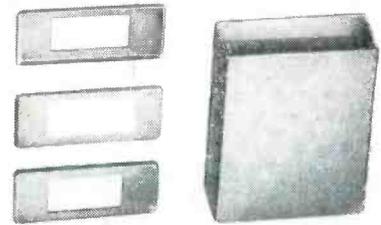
Component parts of output window assembly for rectangular waveguide section that is brazed to tube
